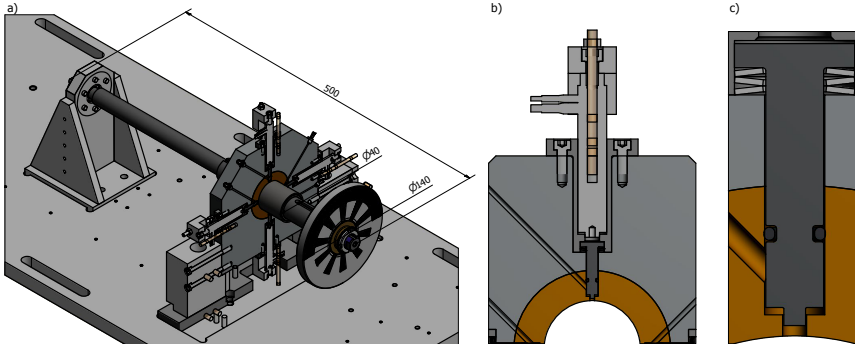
The experimental controllable gas bearing setup. A turbine (1) drives a flexible shaft (2), which is supported by both a ball bearing (3) and the controllable gas bearing (4) with four piezoactuated injectors. A disc (5) is mounted in one end to preload the journal and displacement sensors (6) measure the lateral movement of the disc in the shown reference frame. A quadrature encoder (7) measures the angular position.
